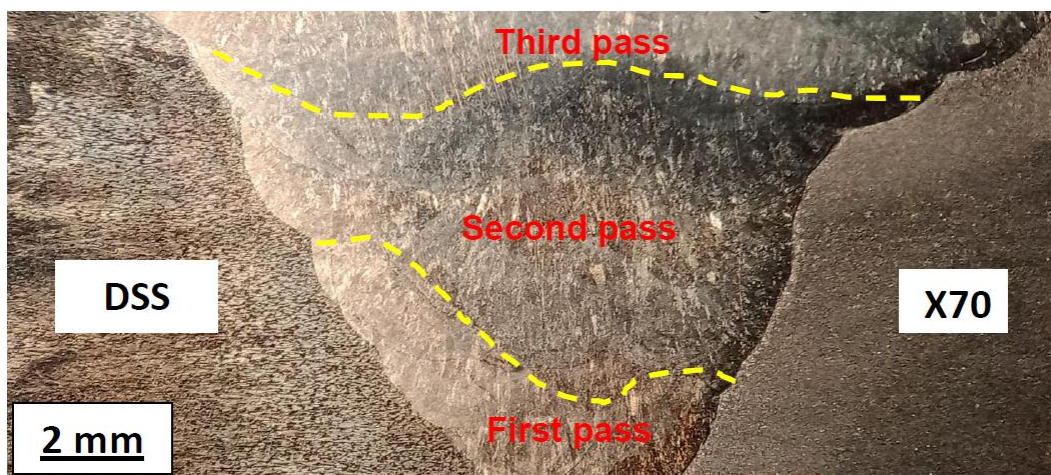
Macrography of the welded joint of X70 steel assembled to duplex stainless steel by tungsten gas arc after the various passes using two different electrodes
